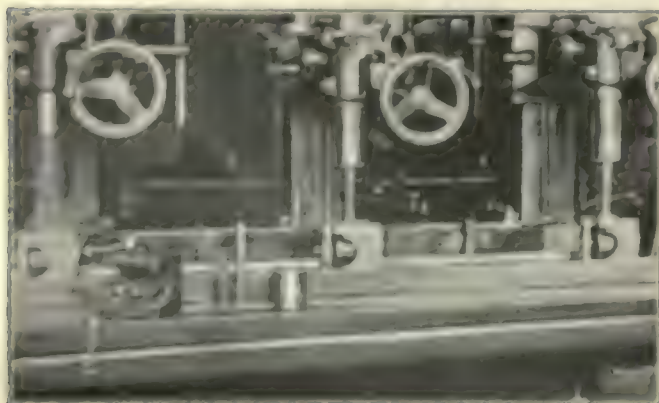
DRILLING AND REAMING THE PIN HOLE
